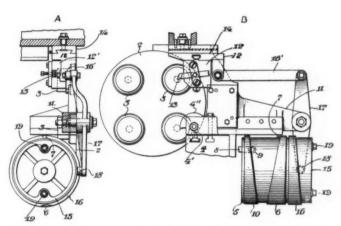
A is an end view showing cross tool slide mechanism for multiple spindle screw machines. Drum 5 in B provides the cam movement
